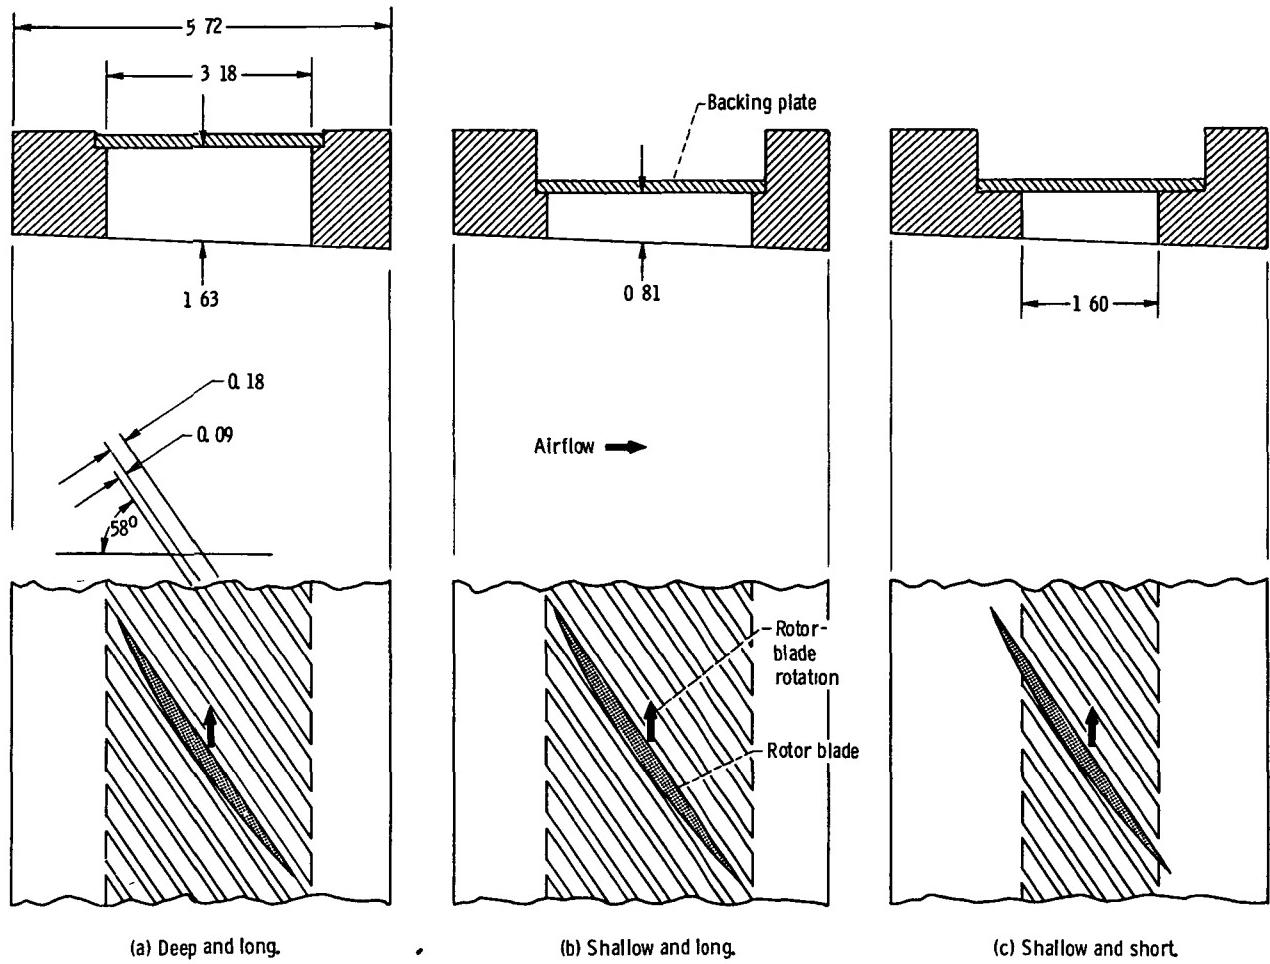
Blade-angle-slot inserts Dimensions in centimeters
